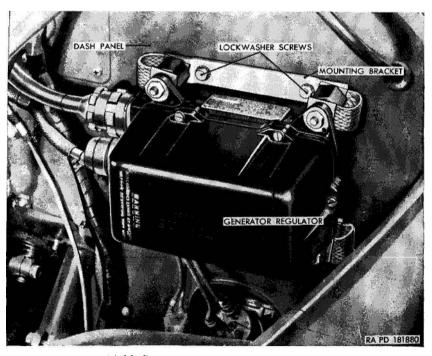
(Added) Generator regulator assembly 11170—installed.
